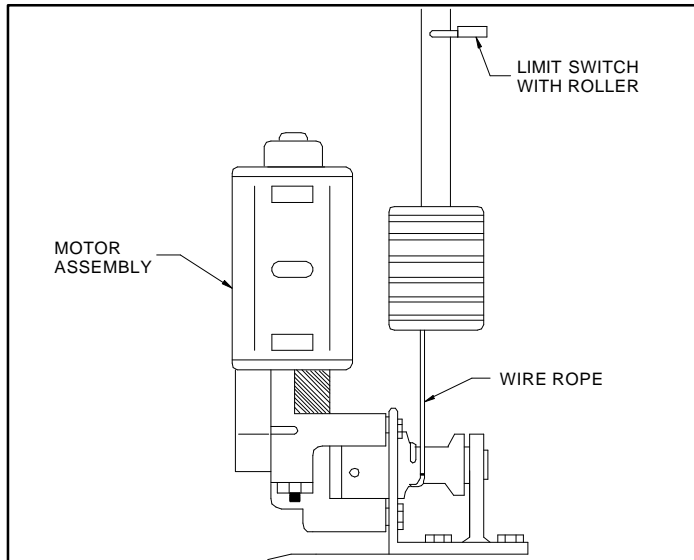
FRONT VIEW OF LEFT-SIDE POWER PARKING BRAKE
